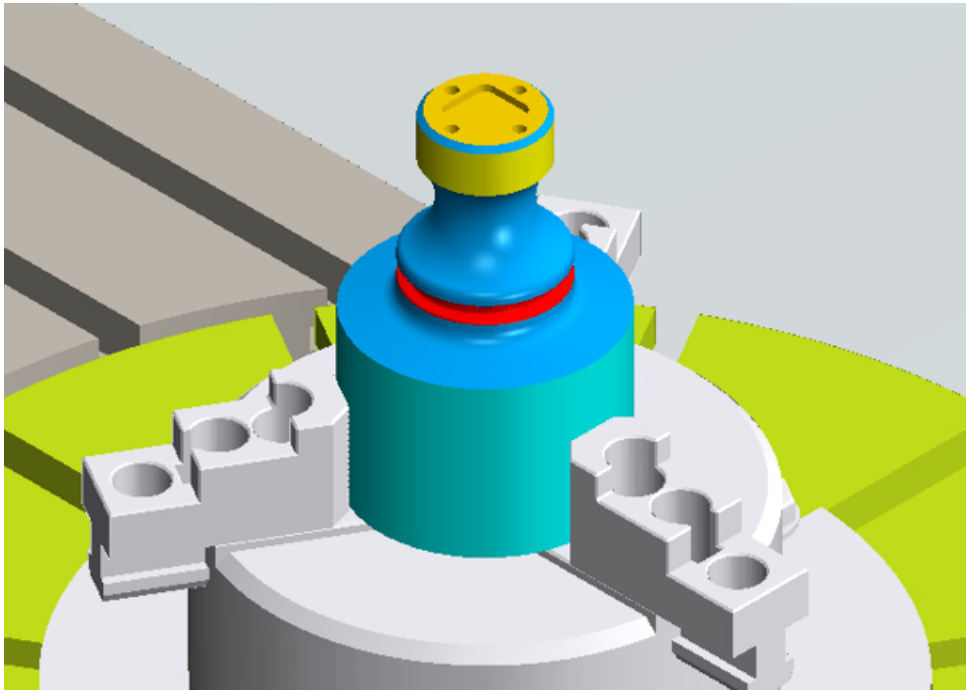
Stock removal simulation Machined surfaces are displayed in the colors of the tool cutting edges, e.g. blue for machining with a "FINISHING_35" tool.
